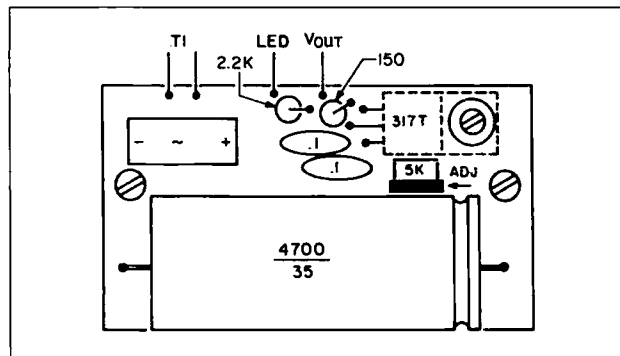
A and 2B. Parts layout and mounting detail for the power supply regulator module. The circuit board is available from Radiokit.
